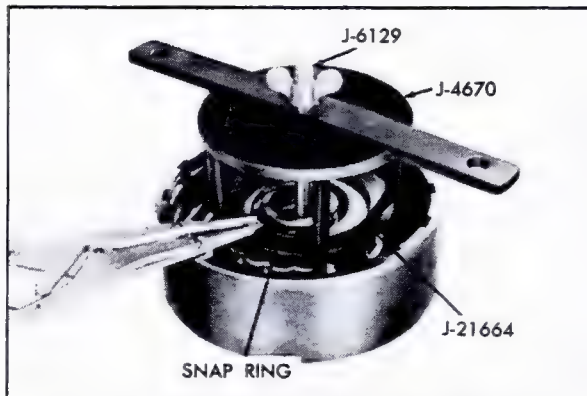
Removing and Installing Direct Clutch Housing Snap Ring
